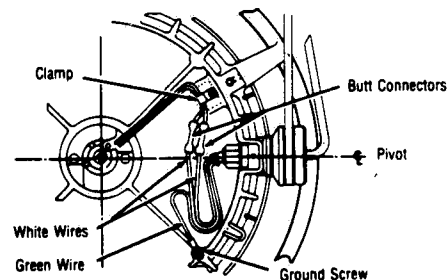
LAMP SOCKET WIRE ROUTING.
